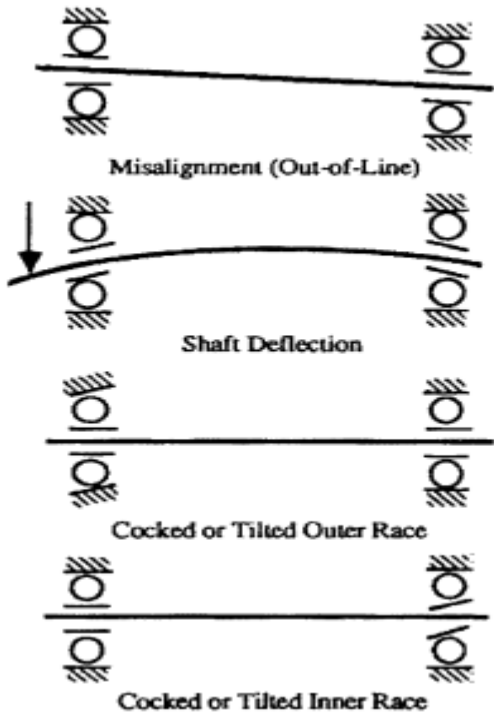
Four types of rolling-element bearing misalignment (M.E.H. Benbouzid, et al, 1999)
